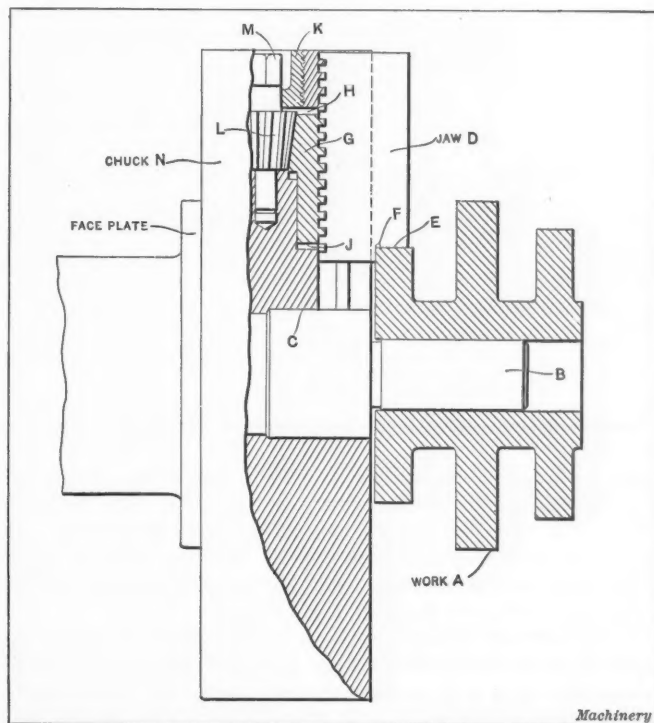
Holding Device employing a Three-jaw Chuck with a Floating Scroll
